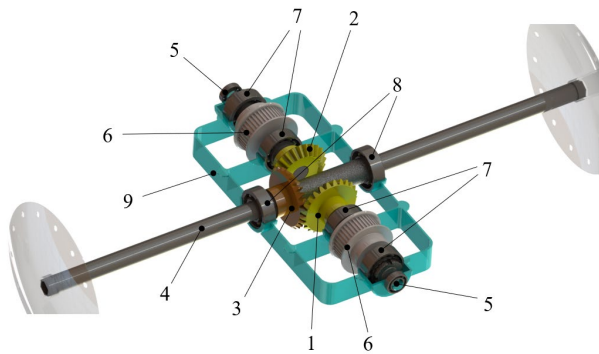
Design solution of the differential gear. 1) - 2) Sun gears; 3) planet gear; 4) drive shaft; 5) steer shaft; 6) pulley; 7) steer shaft bearing; 8) drive shaft bearing; 9) chassis.
